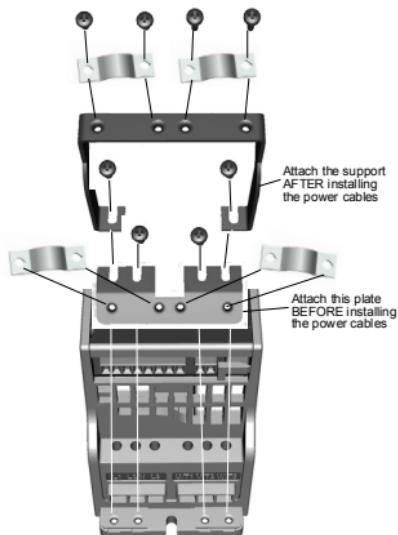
Attaching the PE-plate and API cable support, MI1 - MI3
